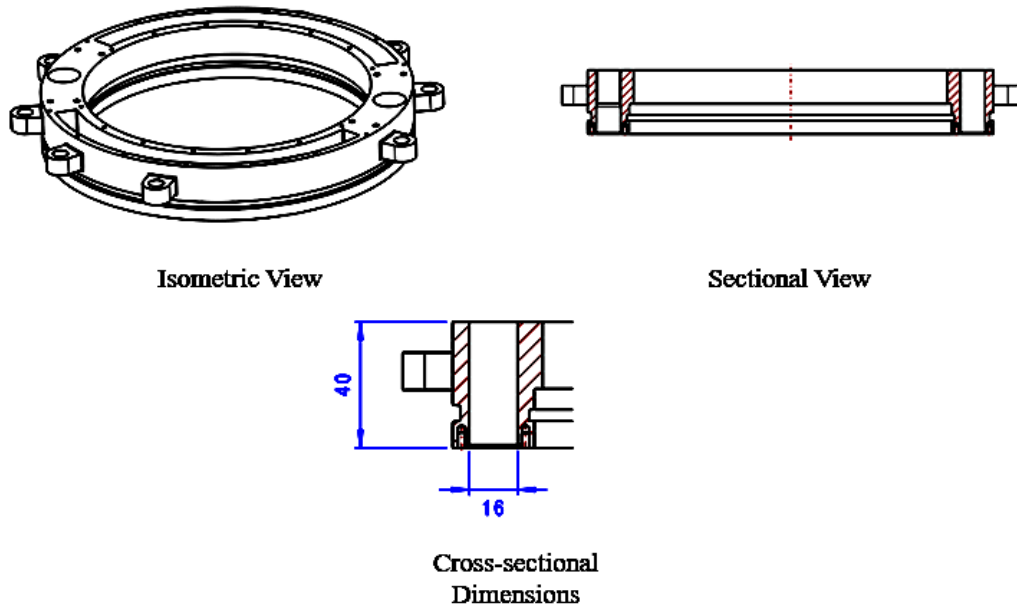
CLSC (On Plane), Aluminum Housing Isometric View, Cross-sectional View, and Related Dimensions
